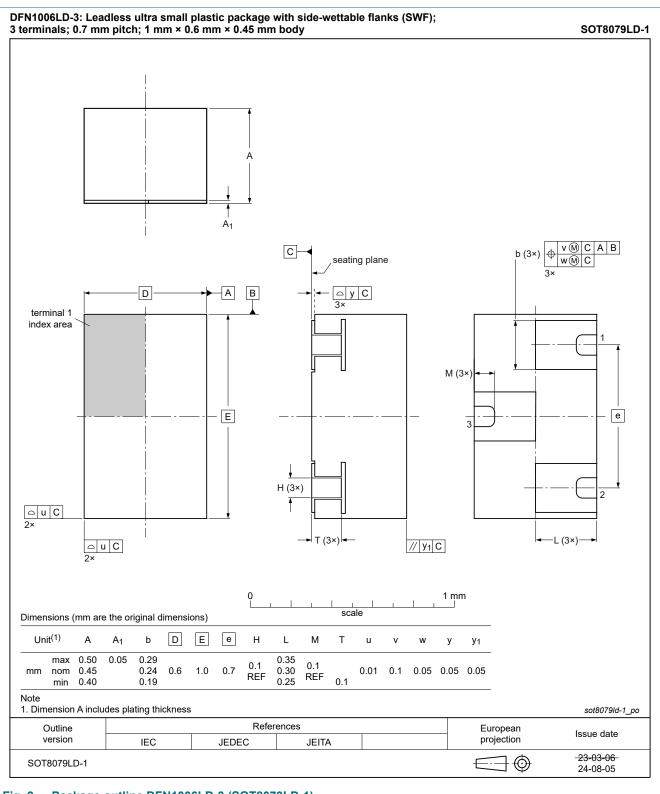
Package outline DFN1006LD-3 (SOT8079LD-1)
